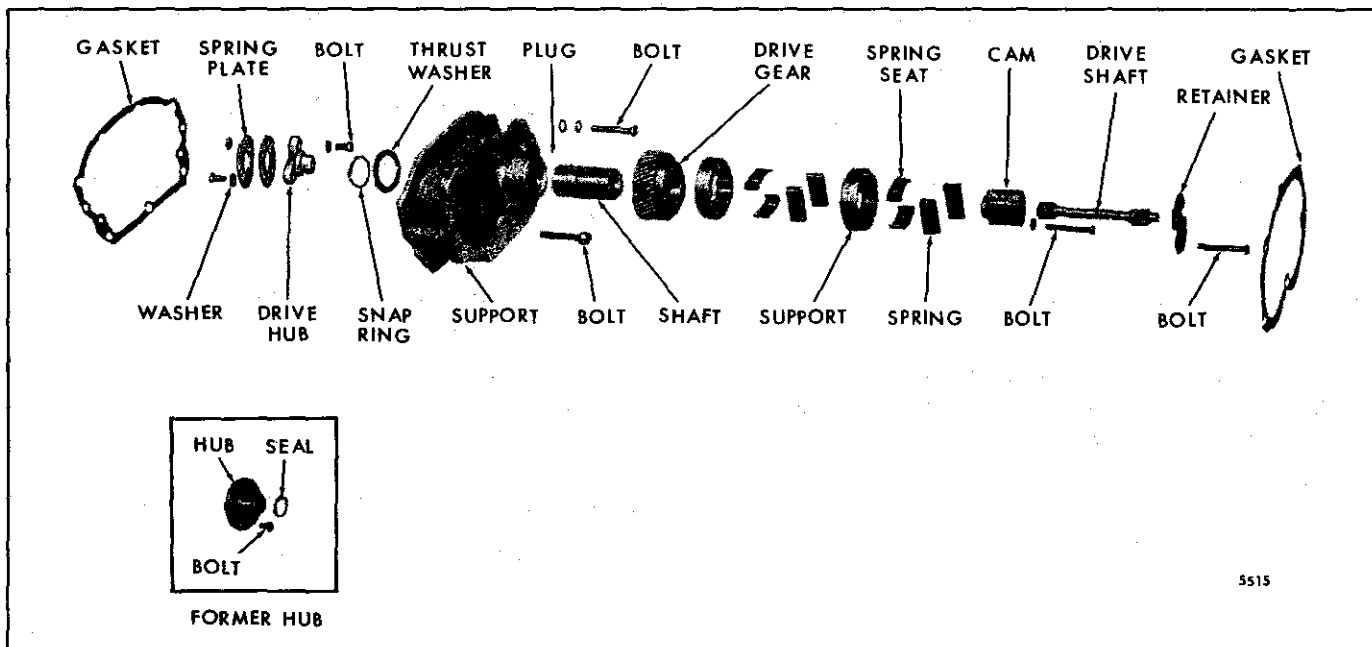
Blower Drive Support Details and Relative Location of Parts (8V-53 Engine)
